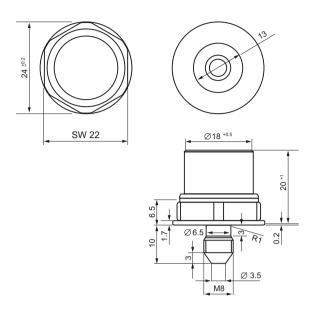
Dimensional drawing of MDS D528 All dimensions in mm
